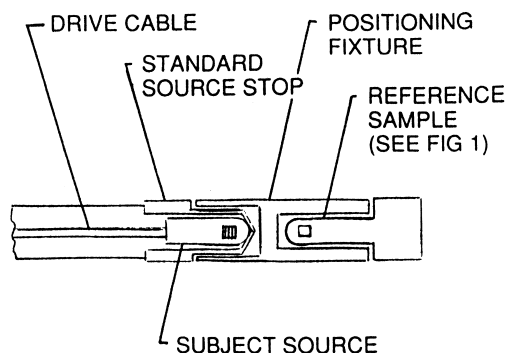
TYPICAL ARRANGEMENT USING A STANDARD GUIDE TUBE AND SPECIAL POSITIONING FIXTURE
